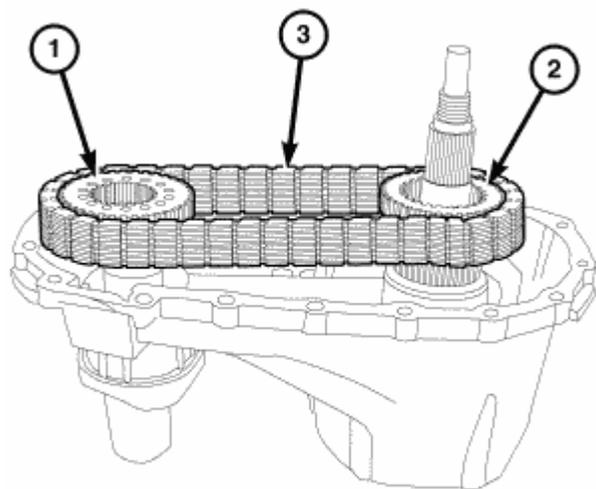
Removing/Installing Mainshaft & Differential Assembly
